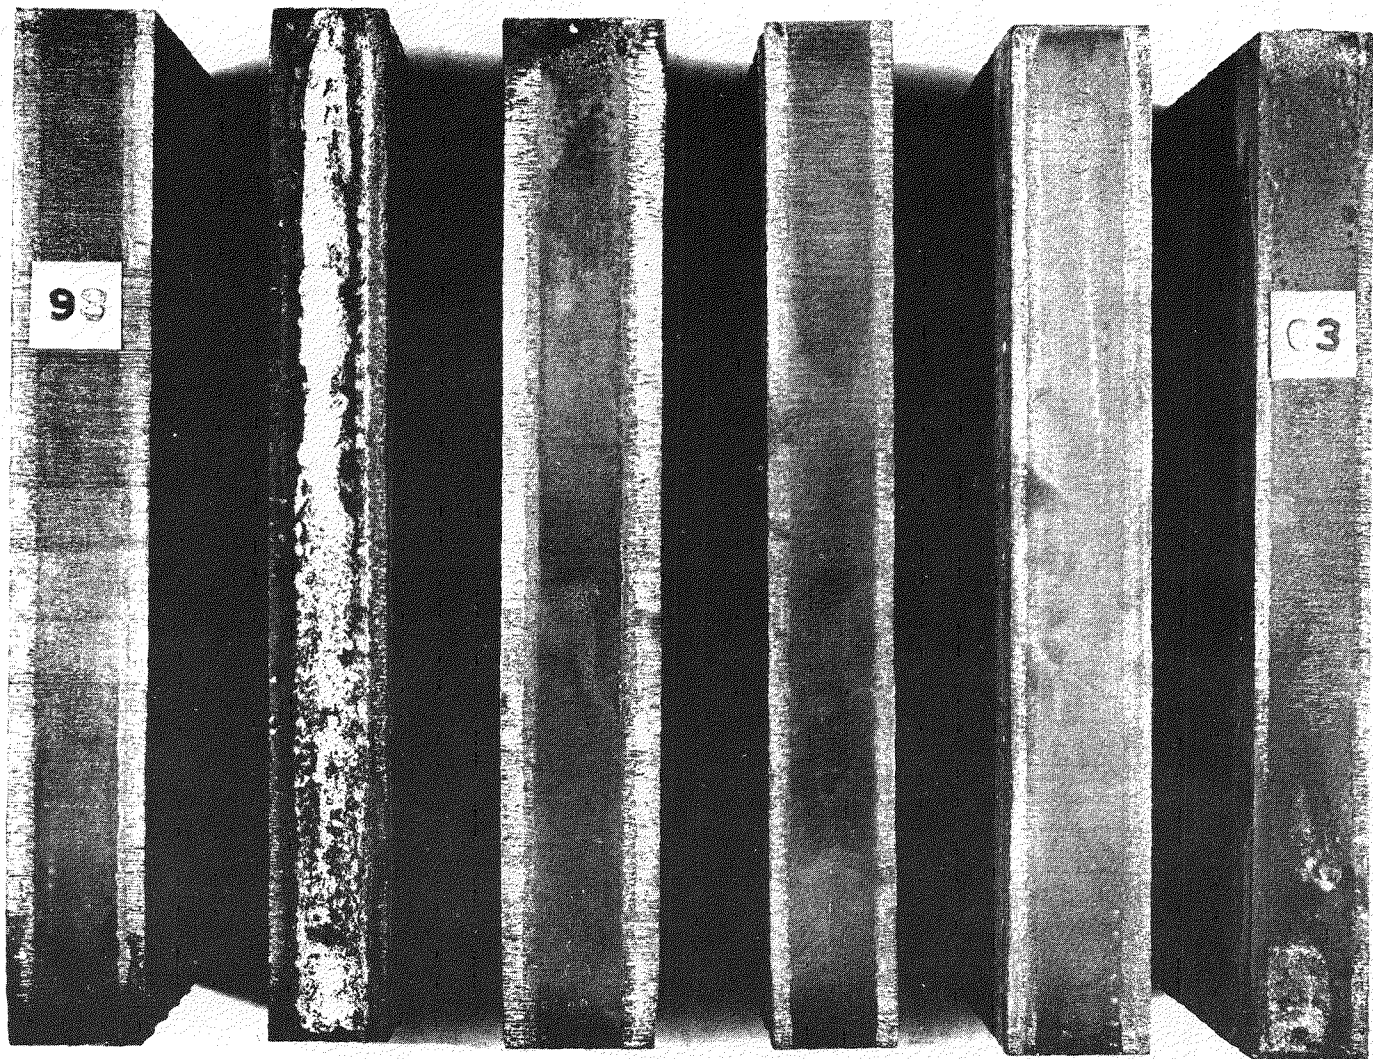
Edge view INCONEL FM72-310SS weldments after exposure.
